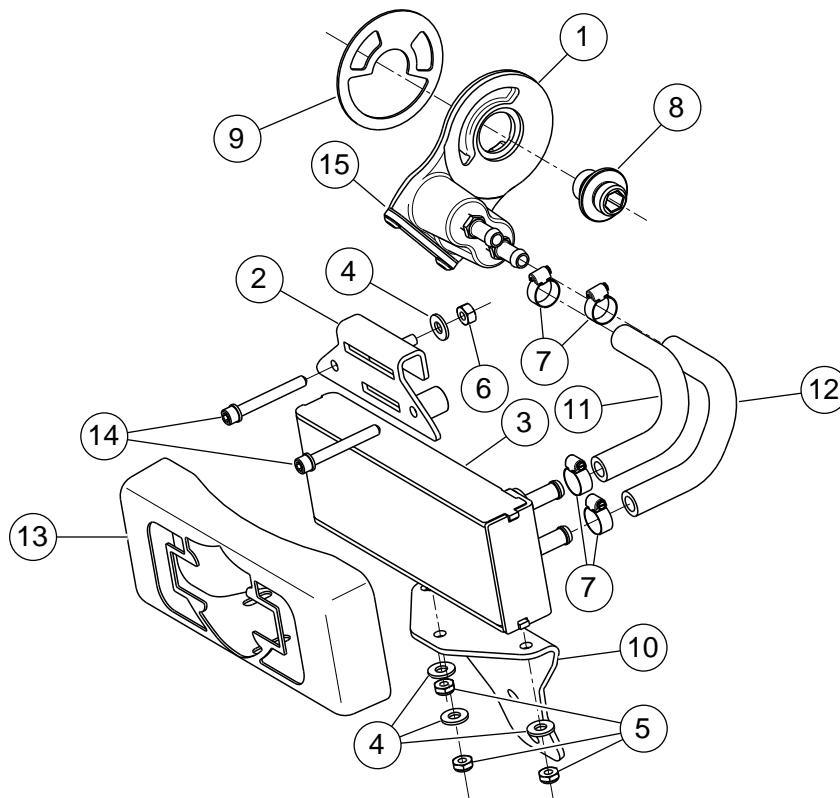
Service Parts for Dyna Oil Cooler Kit and Chrome Oil Cooler Cover
